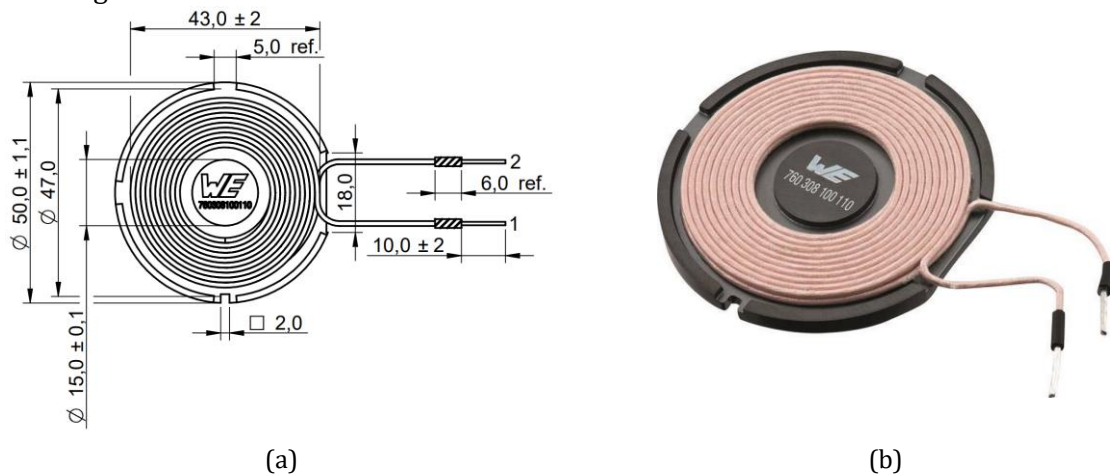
The Original coil 760308100110 from WE which ferrite pad was used for the rewinding process. (a) Dimensions of the coil. (b) A picture of the coil. Source [44].
